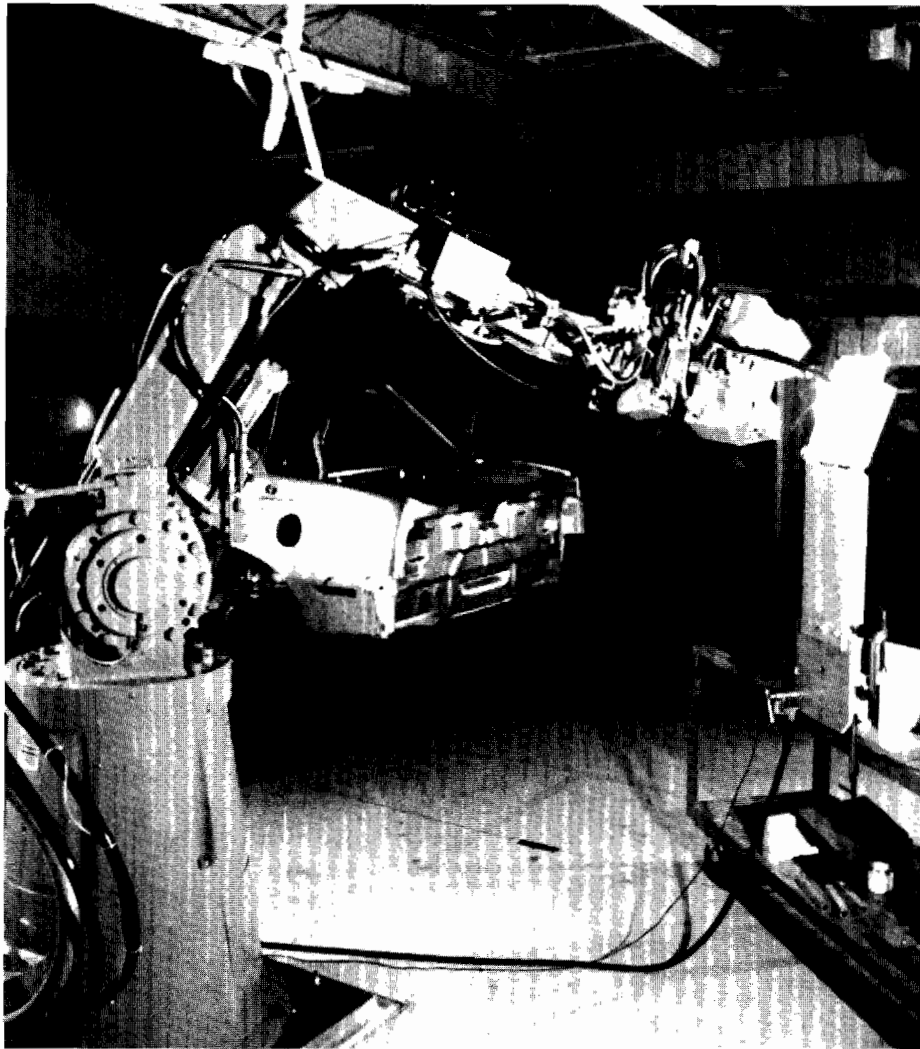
Robotic Vision, Inc., three-dimensional vision system mounted on a robot and used for guiding a seam-welding gun. (Courtesy of Robotic Vision, Inc., Melville, New York.)
